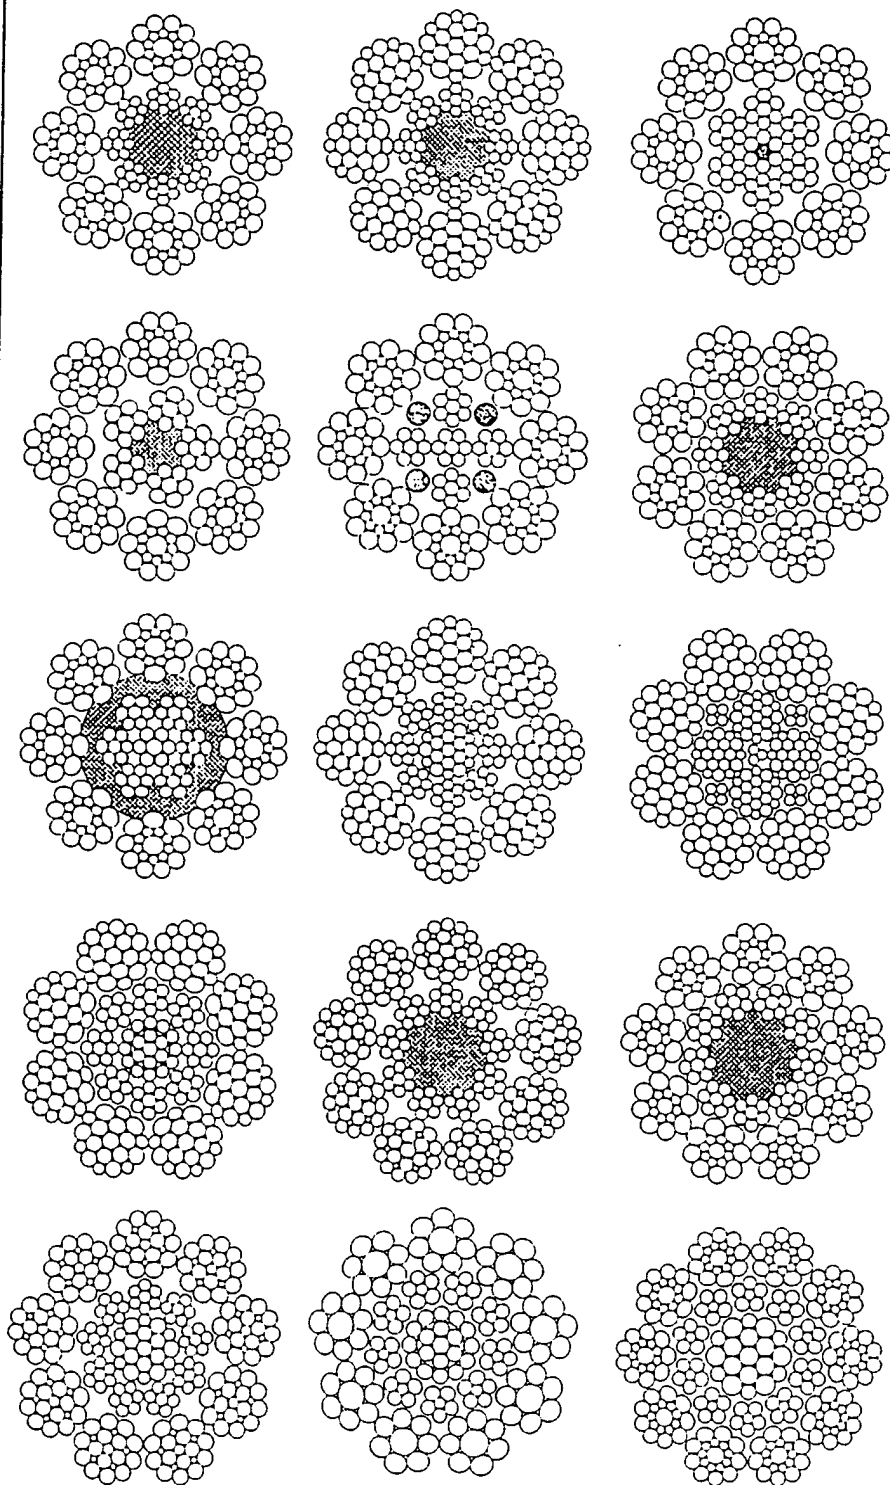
Overview: Rope cross sections of elevator ropes with steel cores (not comprehensive)
